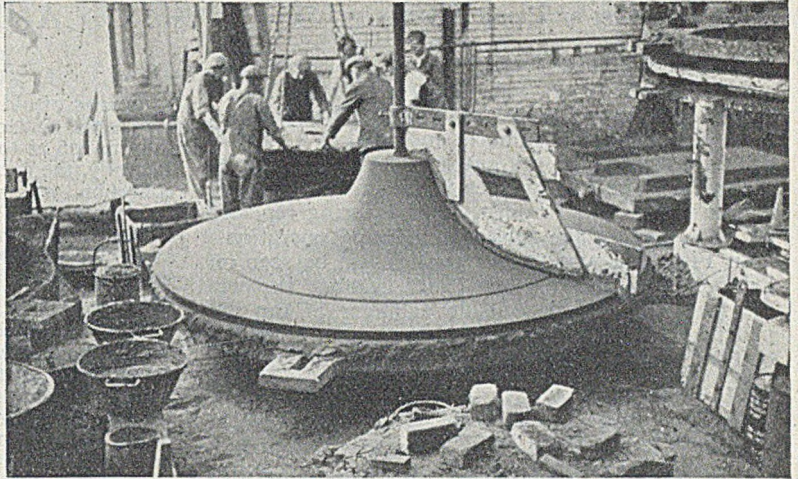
Casting the Volute Section. The Runner Box and the Method of Bolting Down the Mould can be seen.
